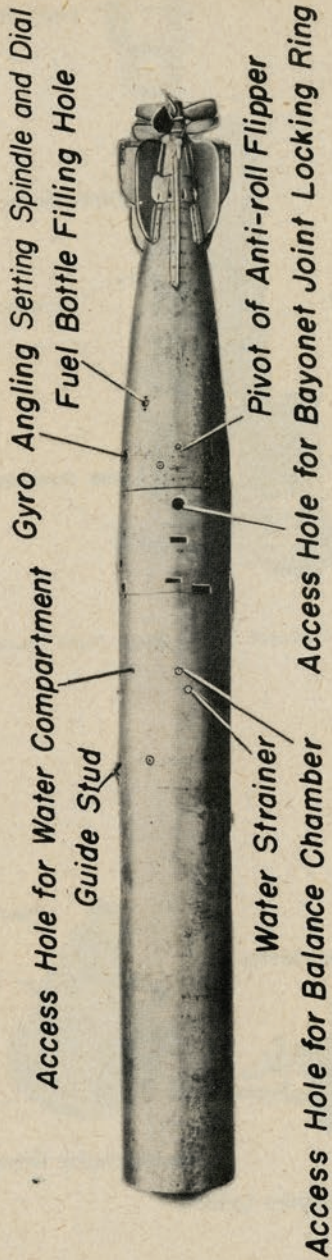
Torpedo Type 91 Mod 2, Warhead Removed
